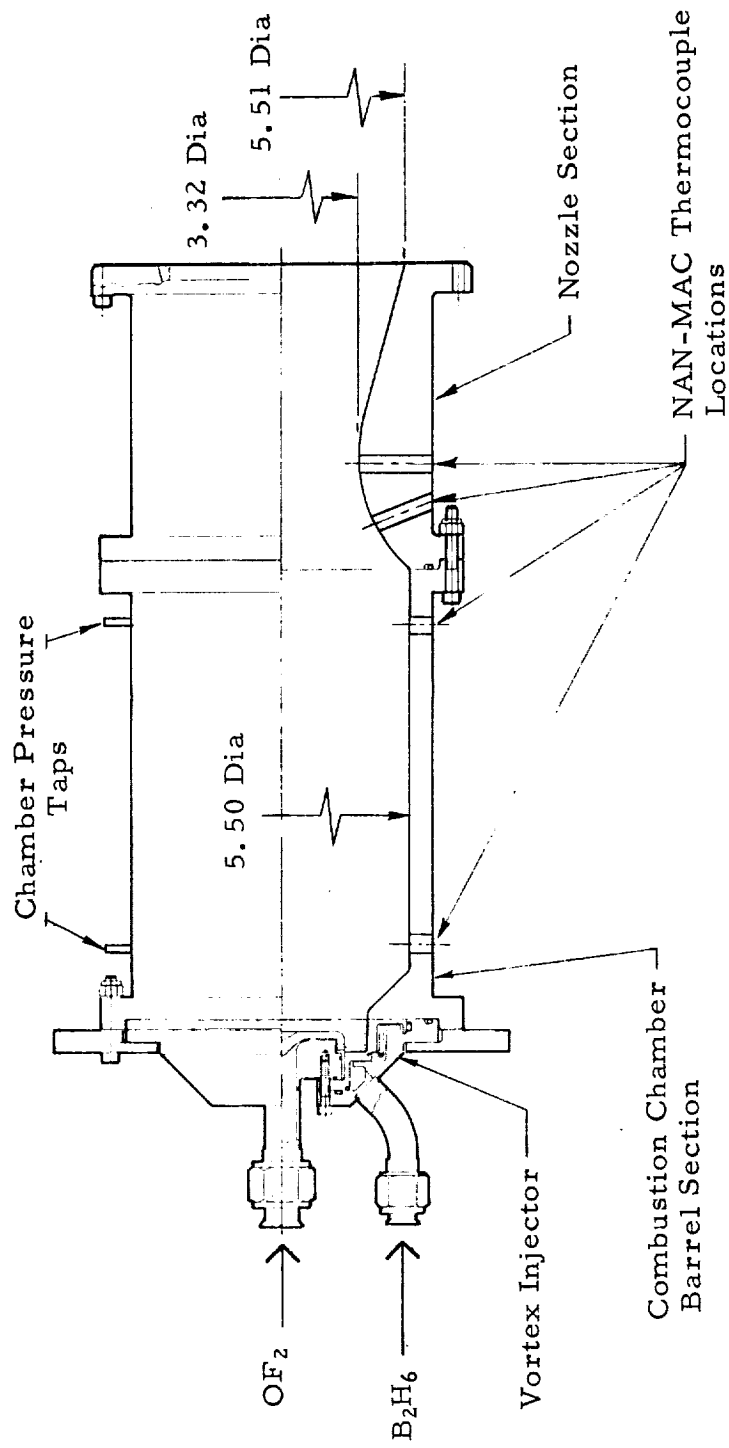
Uncooled Heat Sink Thrust Chamber Assembly X315863A
